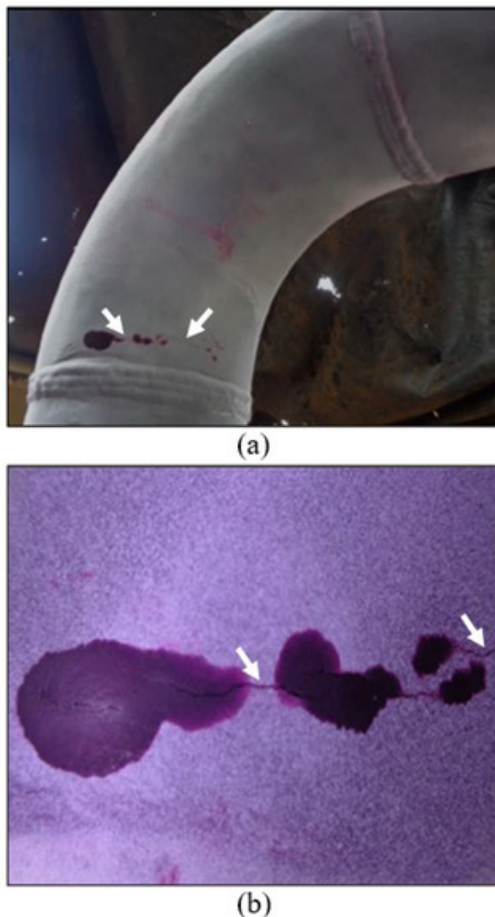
Cracks parallel to circumferential weld revealed during liquid or dye penetrant testing (a) General view showing the cracks' location; (b) Details of the cracks.
